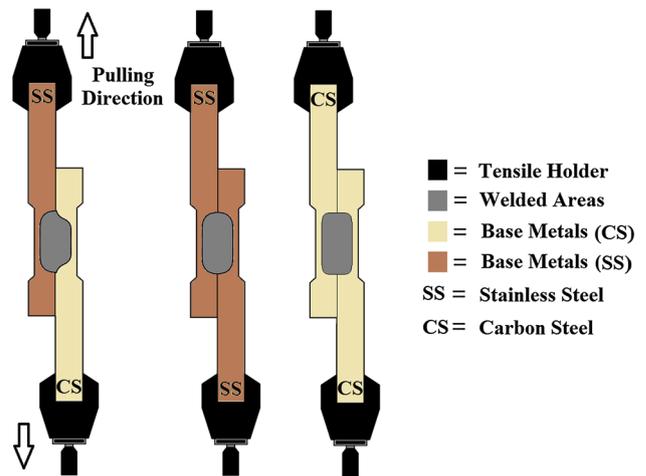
Tensile shearing test of carbon steel, stainless steel, and both steel mixed welds
